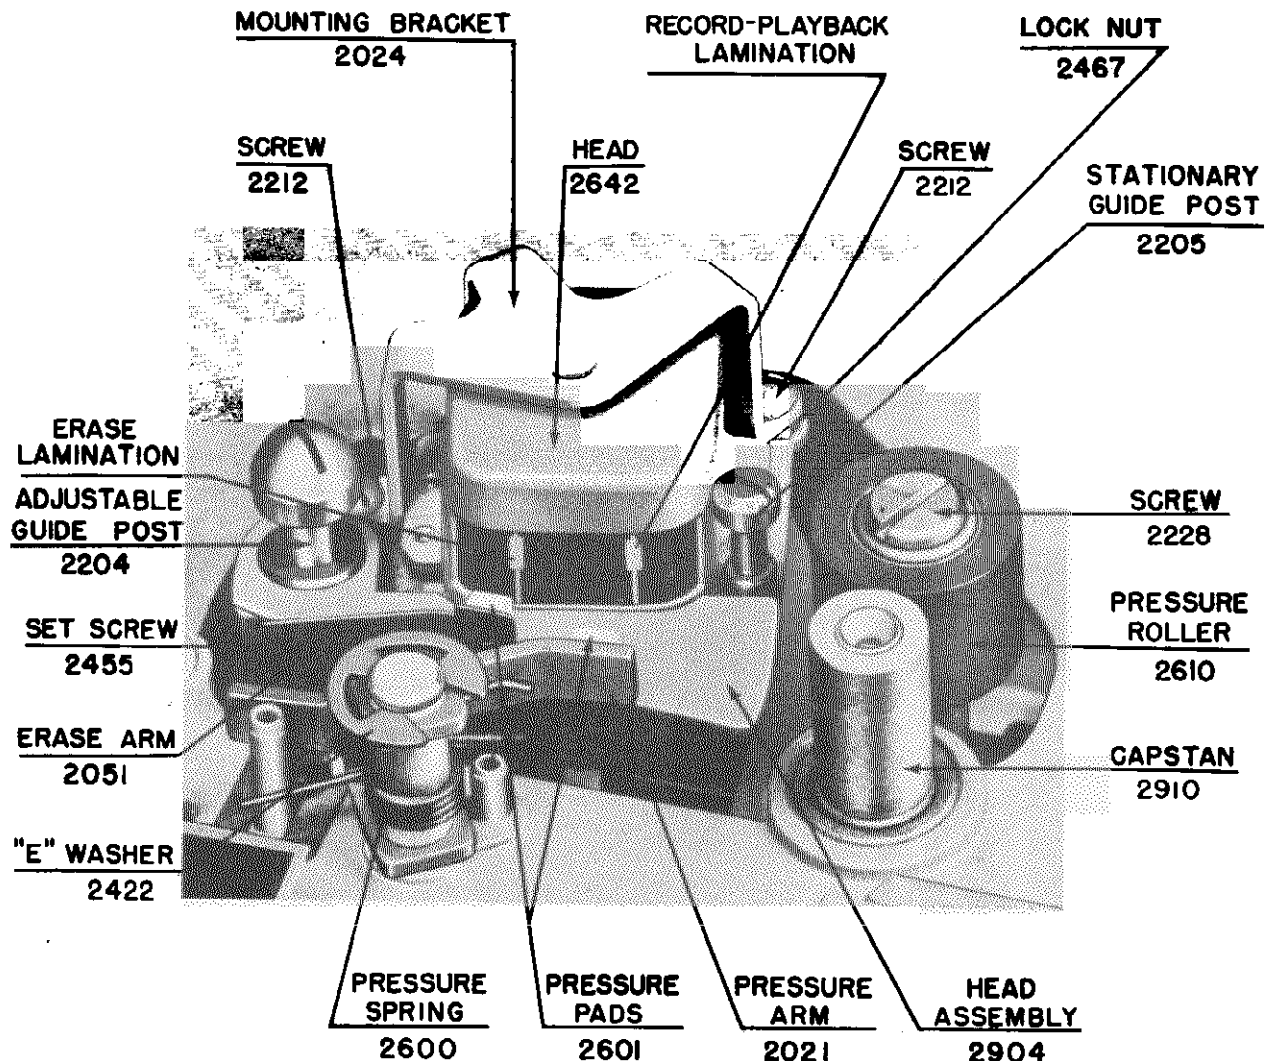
Recorder with Head Covers Removed Showing Head Mechanism.
